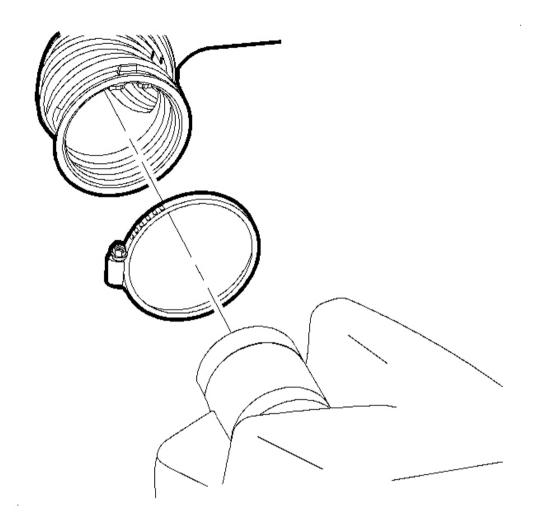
View Of Air Cleaner Assembly Courtesy of GENERAL MOTORS CORP.
